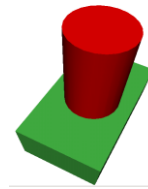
Tool Figure 5: Cross Slide & Tool Post
